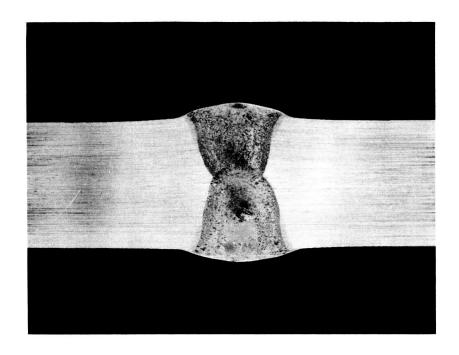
TYPICAL CROSS-SECTION AND JOINT PREPARATION FOR 0.187-INCH MIG WELDMENTS
